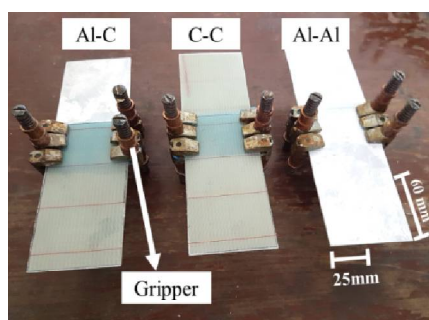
Applying pressure on the surface of bonded lap joints specimens using clamps
